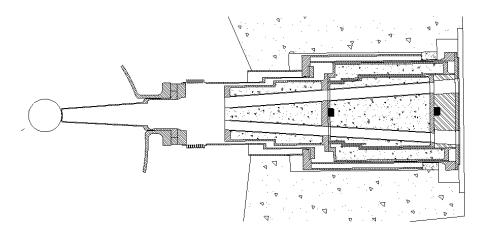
Principal design of a beam tube plug with 2 neutron channels and a rotating shutter
